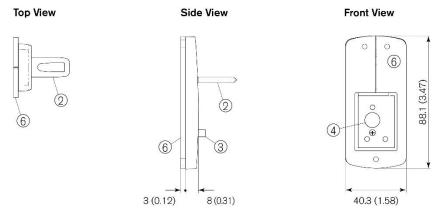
Dimensions of the GAT NET.Lock BoltSet 7300
